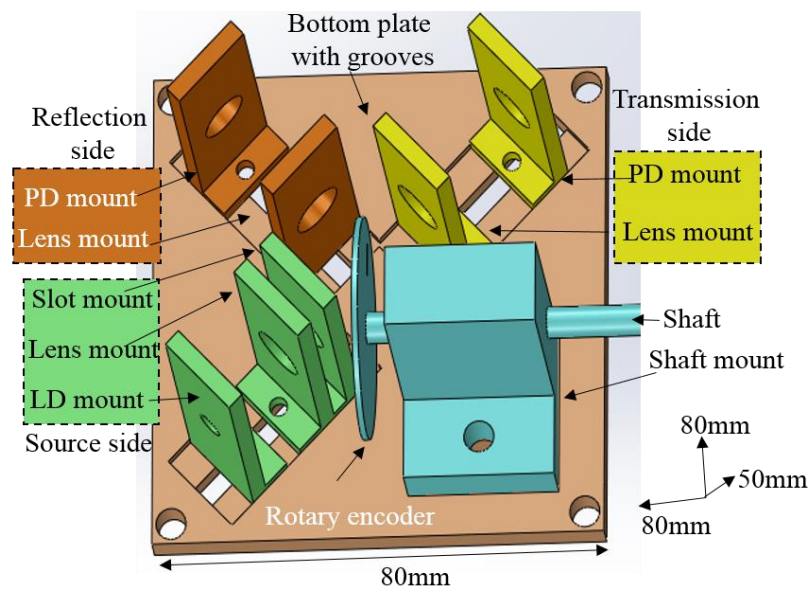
Mechanical assembly: mounts for LD, PDs, lenses in the reflection and transmission sides, and shaft mount. The sizes of final housing are 80mm x 80mm x 50mm. LD: Laser diode, PD: Photodiode.
